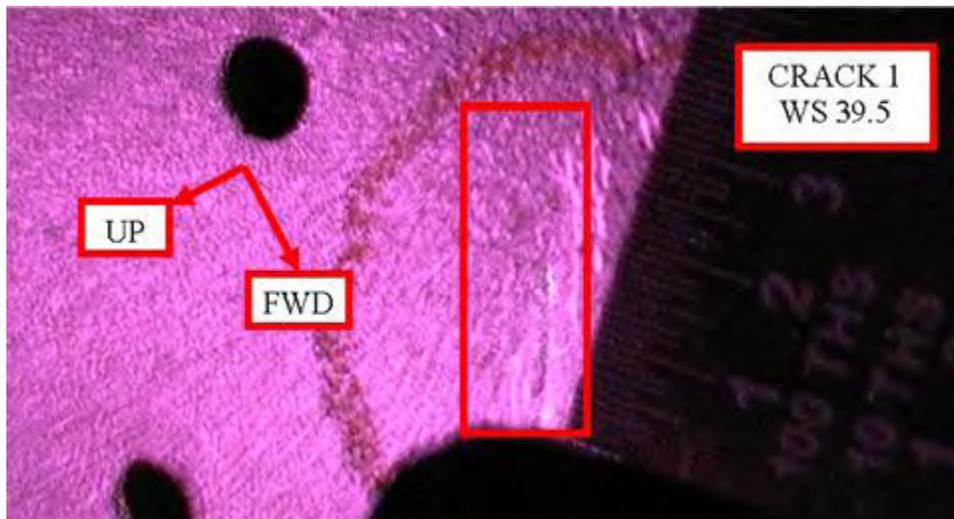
Location of Cracks 1 and 2 on the Right Wing Rear Spar Rib Assembly WS 39.5
